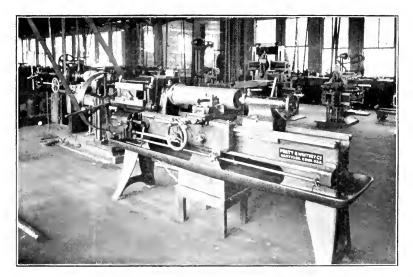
Lathe used in Tests with High-Speed Tool Steels
